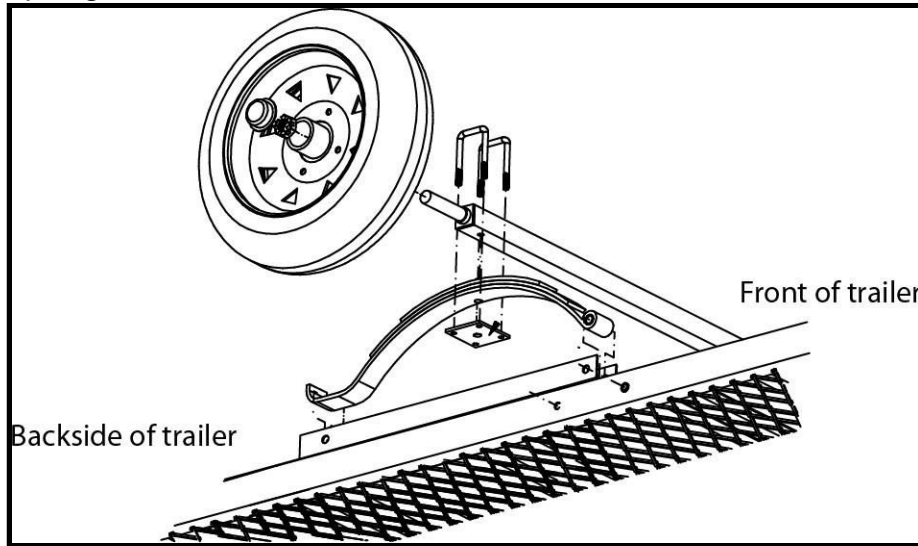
A diagram of the leaf-spring, trailer frame, axle, two u bolts, spring-plate, and wheel/hub assembly
